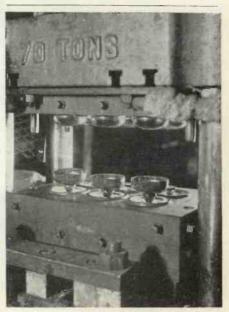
Moulding of Bakelite (Finished. Mouldings ejected). Courtesy of Bakelite, Ltd.
